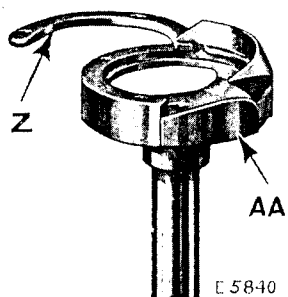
Sewing Hook Removed from Machine Showing Hook Washer
